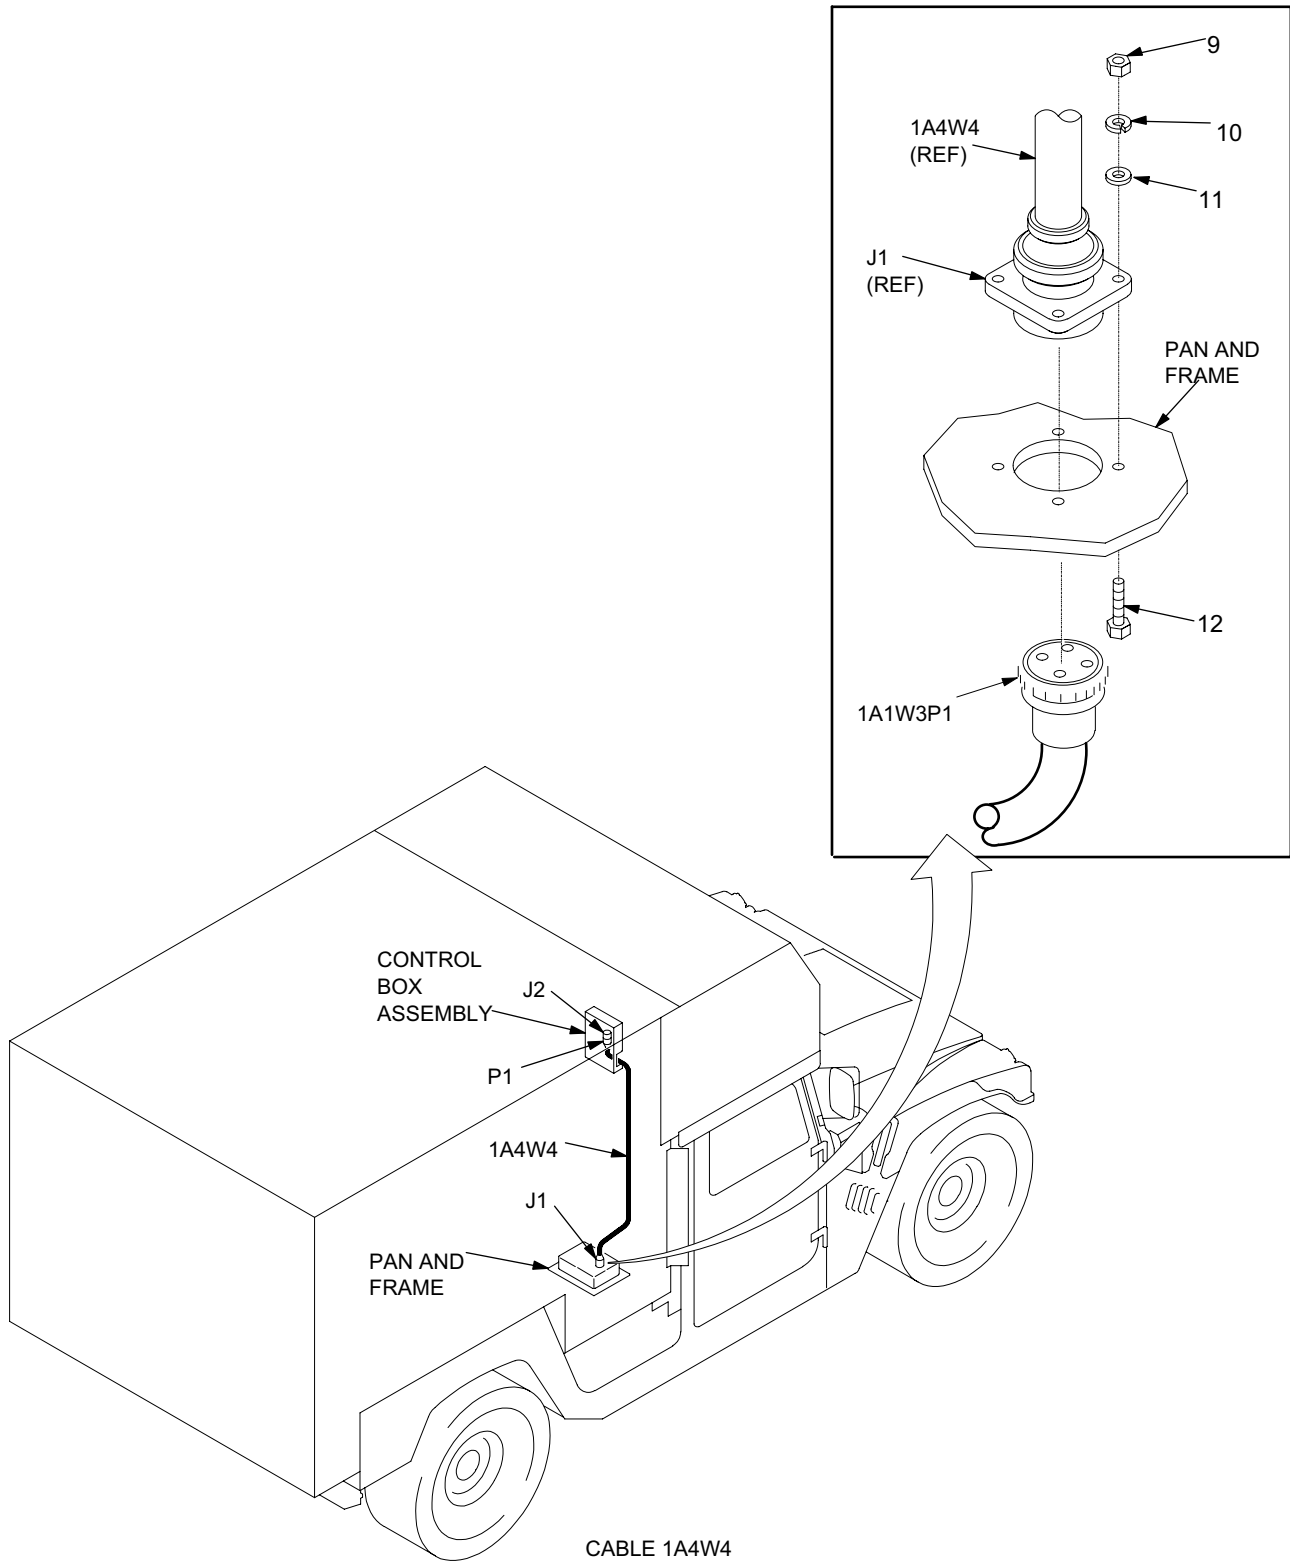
Electrical Cable Replacement (Sheet 5 of 12)
